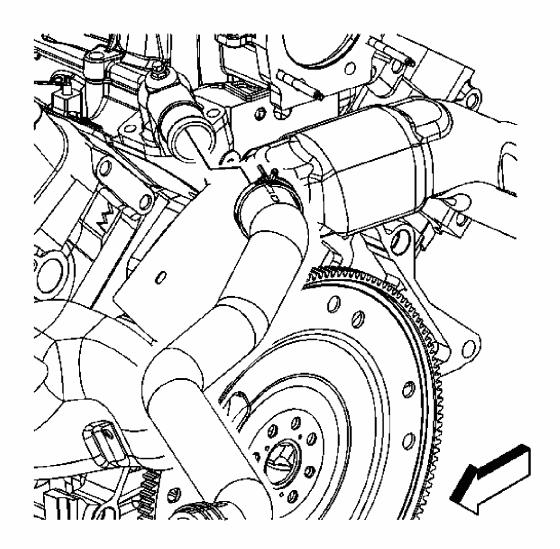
Locating Inlet Hose Clamps Courtesy of GENERAL MOTORS CORP.
